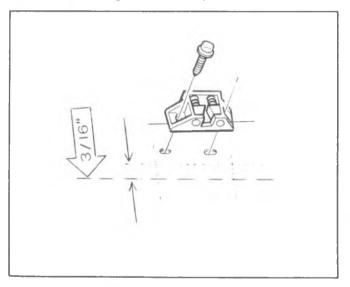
D-118-Adjusting the Rear Wedge Assembly
